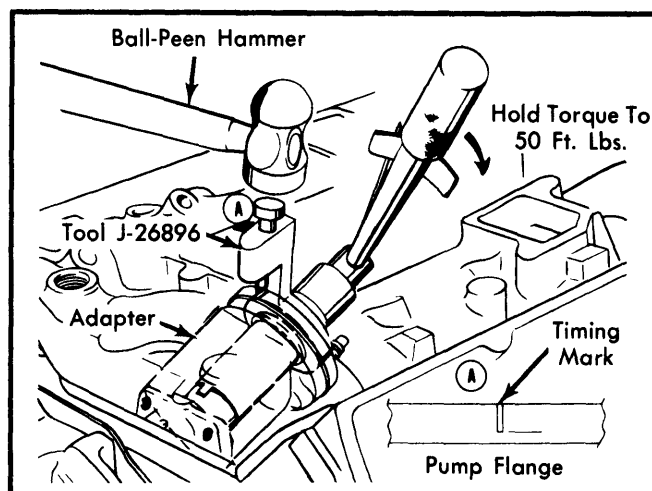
Holding Torque On Adapter While Marking Timing Mark
